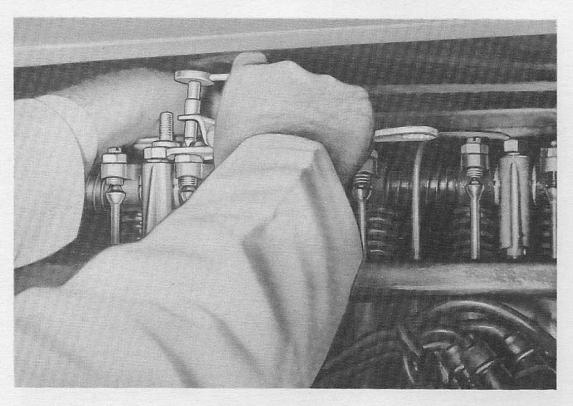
Adjusting Clearance Valve Stem to Rocker Arm
